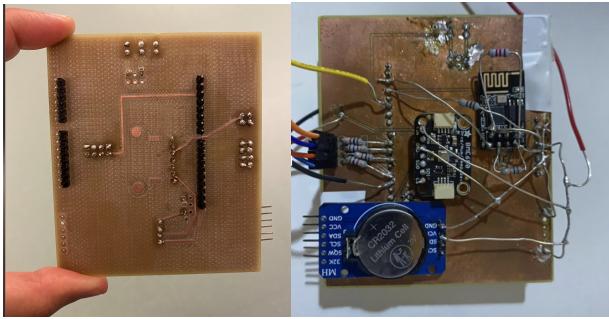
First picture is the back of the printed circuit board; second picture displays the front.
